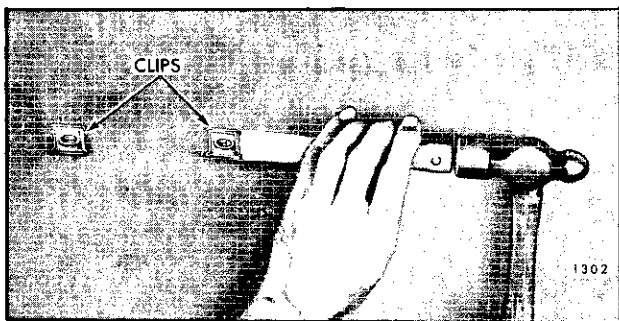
Removal of Bath-Tub Type Molding Clip
